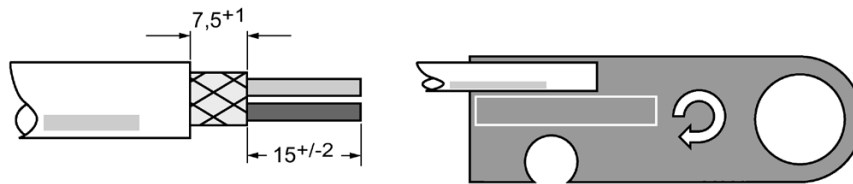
Stripping dimensions for the PROFIBUS DP cable
